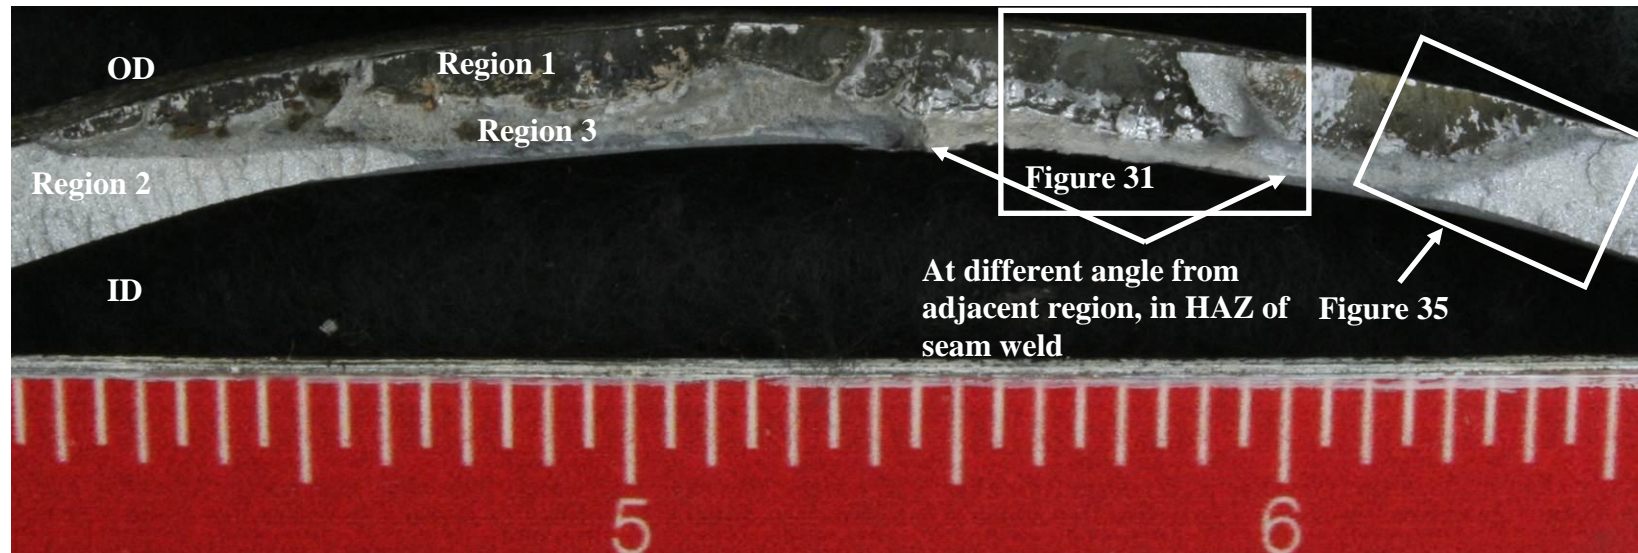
Photograph of the fracture surface removed from Crack Colony 4 after mild cleaning in Endox.
